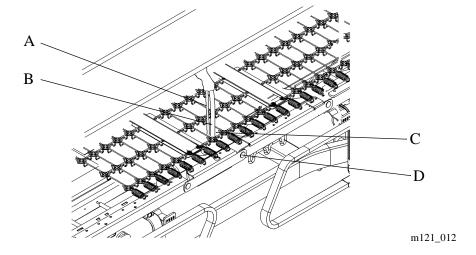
Bed Equipped With a Hard Panel Sleep Surface
